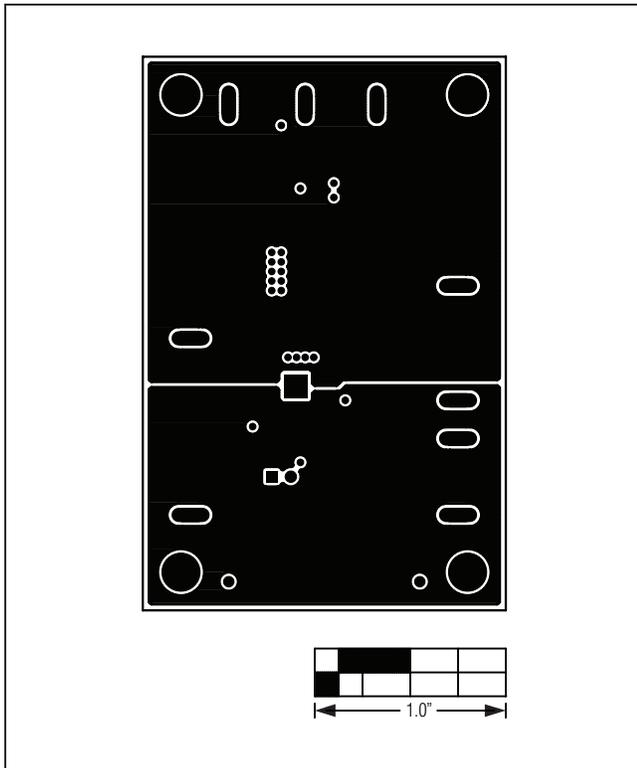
MAX17512 EV Kit PCB Layout—Layer 4
